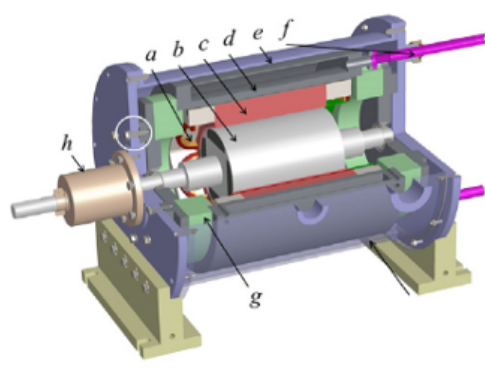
HTS partially superconducting PM radial flux machine. (a) HTS armature coils, (b) permanent magnet rotor, (c) stator iron, (d) stainless steel Dewar, (e) vacuum chamber, (f) liquid nitrogen pipe, (g) fibreglass torque flange, and (h) magnetic fluid sealing device [10].
